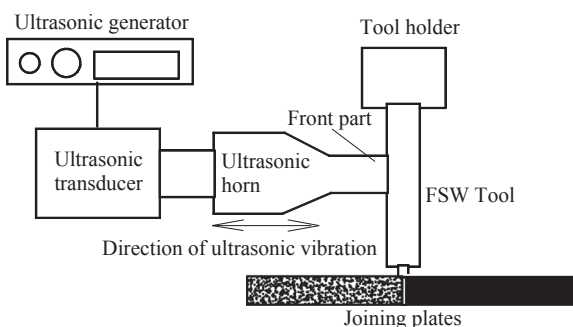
Schematic of ultrasonic-assisted friction stir welding (FSW) [159].
